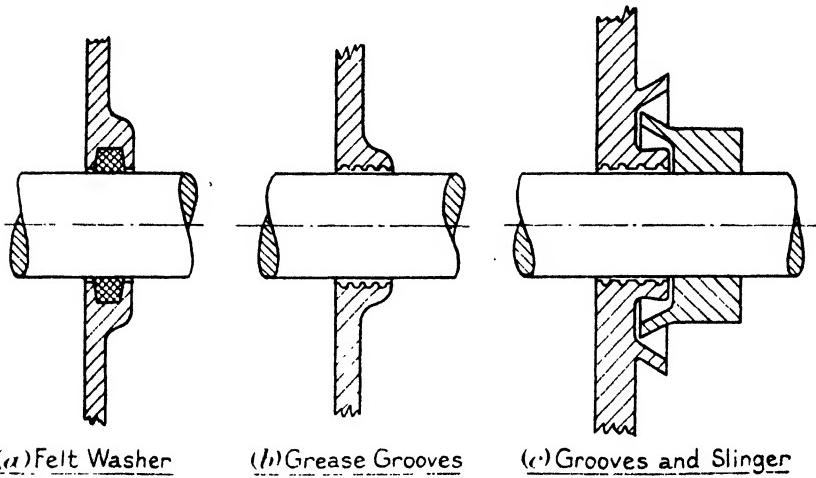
SEALS FOR BALL AND ROLLER BEARINGS
